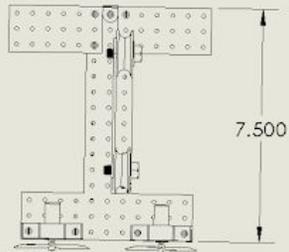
Solidworks Drawing Design 2(By Jacob Prototype 02)
